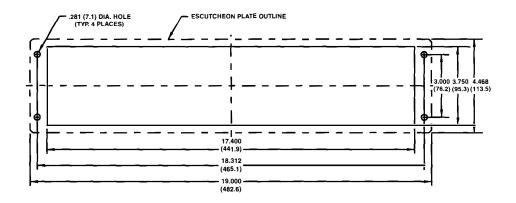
Panel Cutout Dimensions for Horizontal Unit
